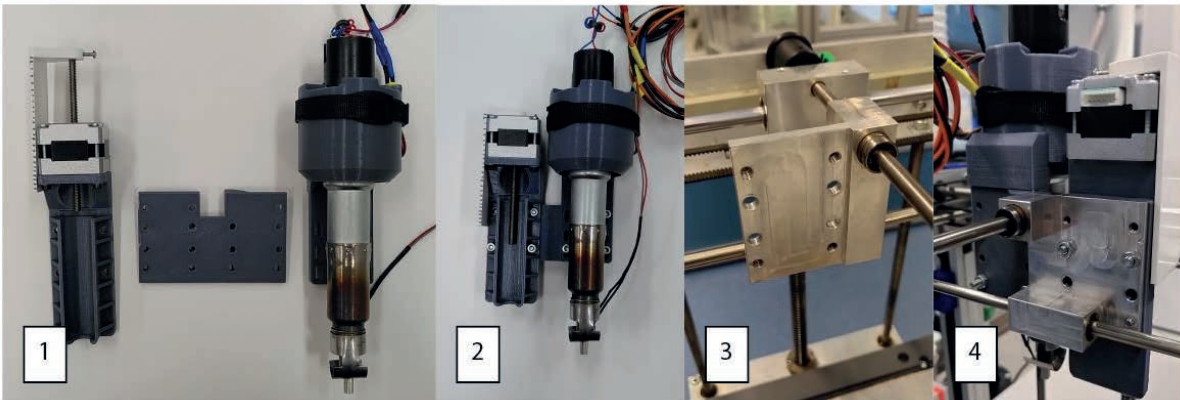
Step by step photos of assembling the solder paste extruder and hot-air gun.
